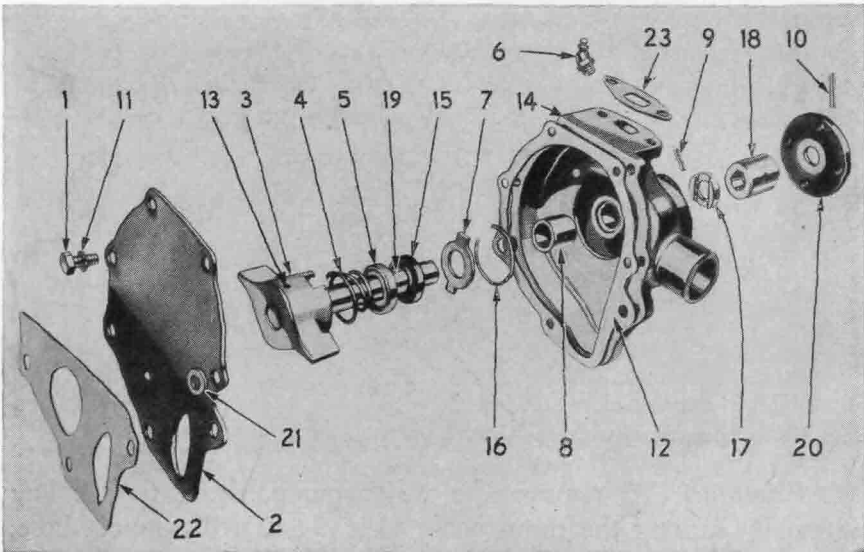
Water pump in disassembled view. (Plymouth Division of Chrysler Corporation)
